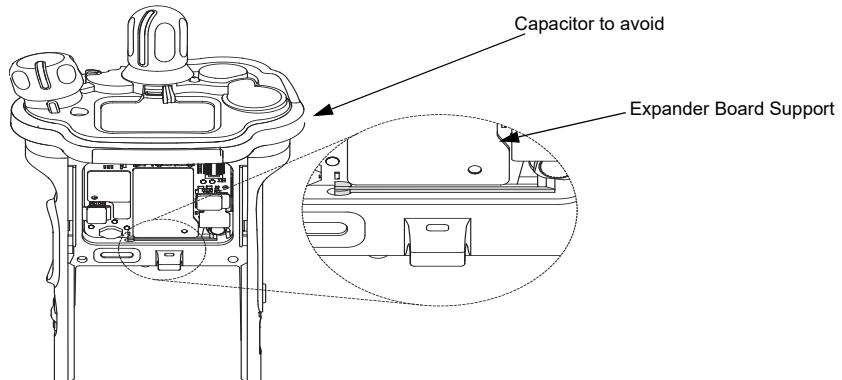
Press Expander Board Support into Place (Opt. Expansion Board)
